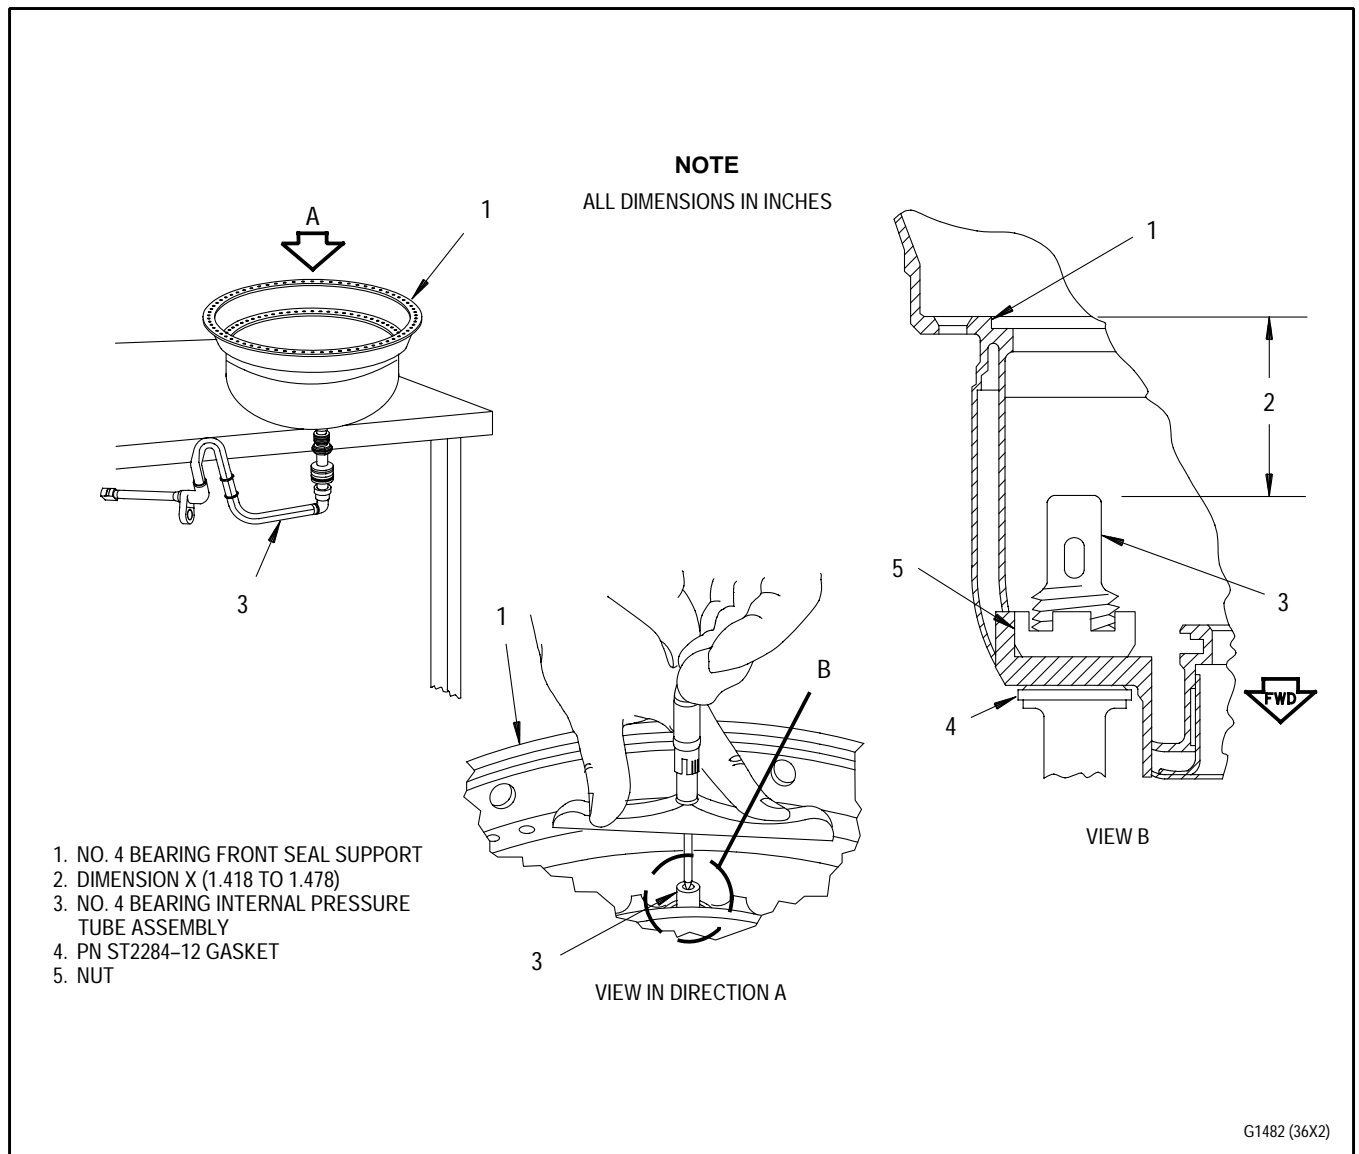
No. 4 Bearing Internal Pressure Tube Assembly - Seating Check Before Installation
